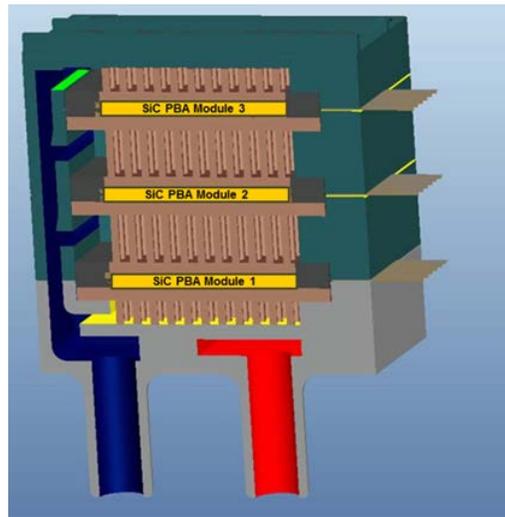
Design for assembly of an integrated double-sided, direct liquid-cooled SiC power electronics block.
